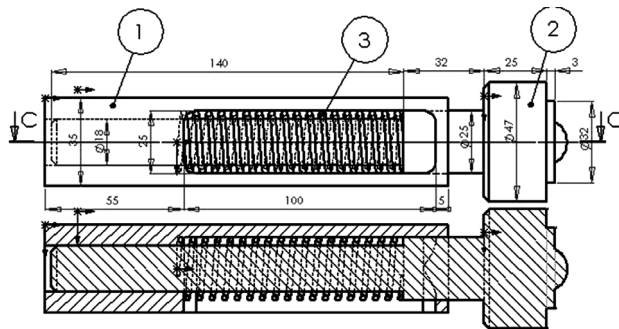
Detailed drawing of the ball burnishing tool: (1) casing; (2) adapter cover; (3) spring²⁵
